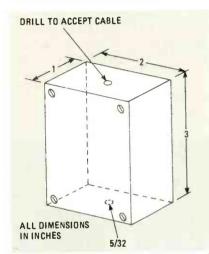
THE AIR TEMPERATURE sensor is mounted in a box with these dimensions and mounted outdoors.
